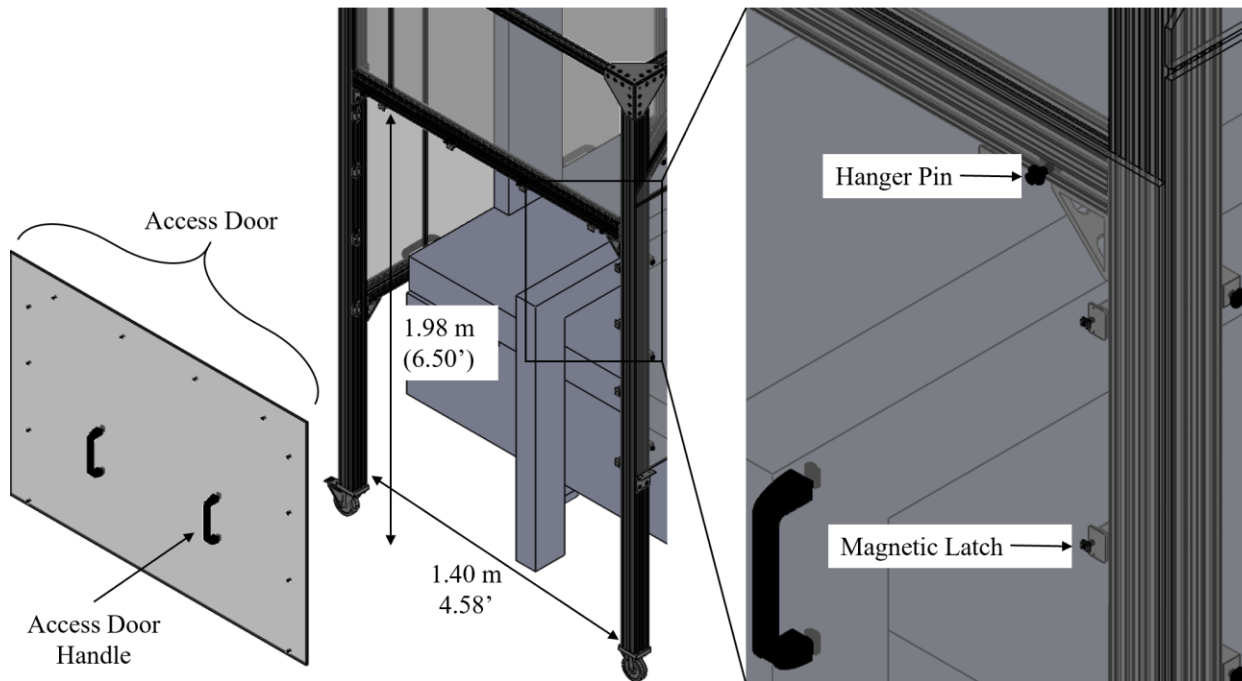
Annotated illustrations of the 3DP 300 printer's custom enclosure's build surface access door design.
